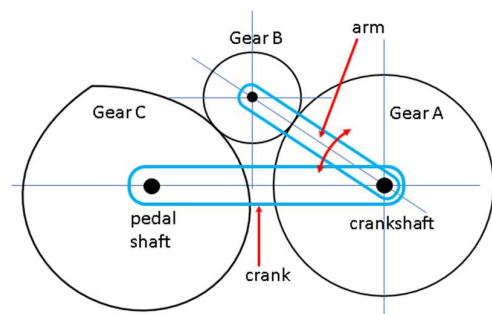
Concept of mechanism, seen with crank stationary. Gear A rotates about the crankshaft and Gear C is connected to the footplate. Gears A and B are circular. B is on an arm that holds it meshed with A. C is non-circular but has a perimeter that is equal to the circumference of A. B is held meshed against C.
